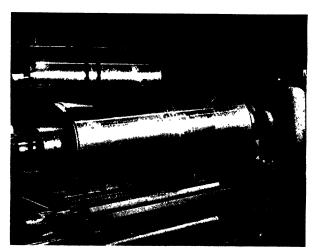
Bush fitted to expanding mandrel for outside machining
